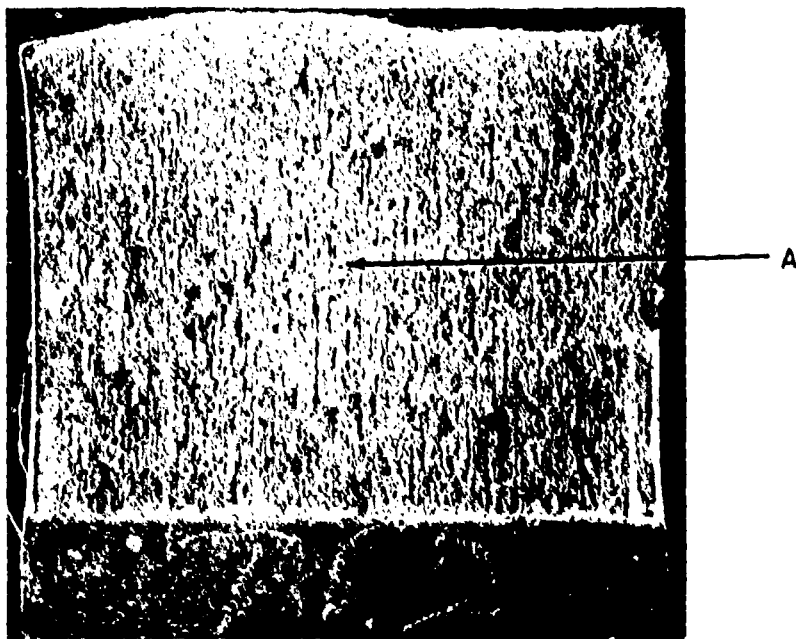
Fracture surface of an A-514 Charpy specimen tested at -18°C , 8x.
